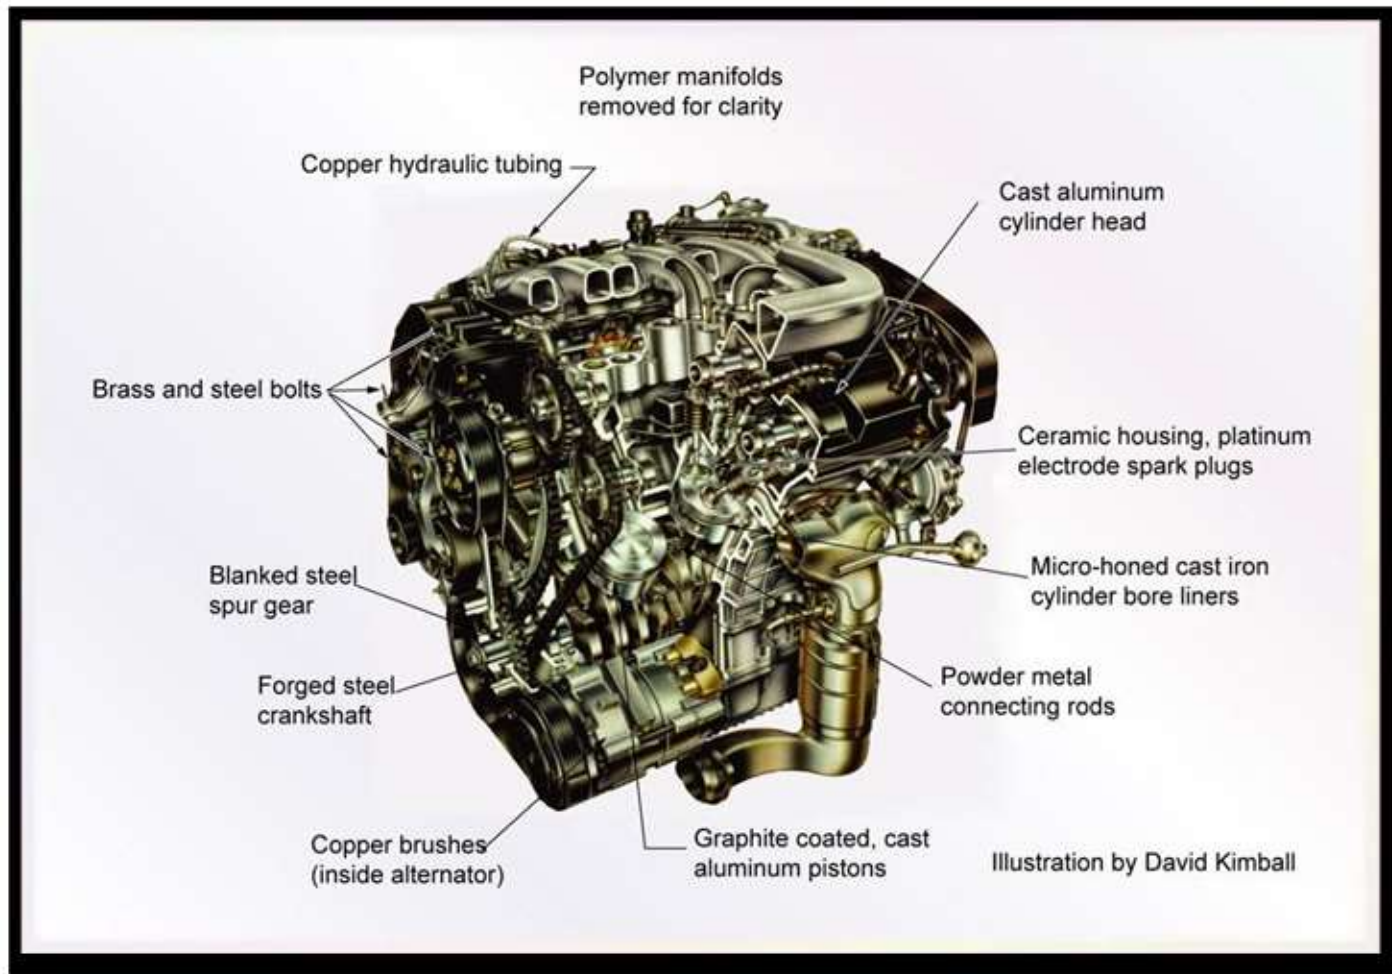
Section of an automotive engine - the Duratec V-6 - showing various components and the materials used in making them. Source: Courtesy of Ford Motor Company. Illustration by David Kimball.
